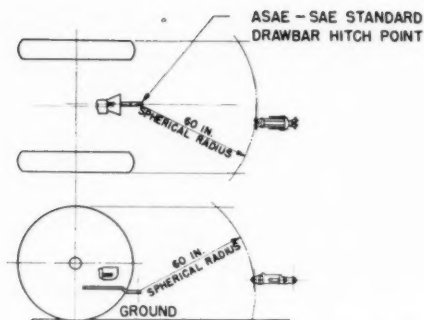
Hose length diagram for wheel-type tractor drawbar — 60-in spherical radius (A.S.A.E.—S.A.E. Standard)
